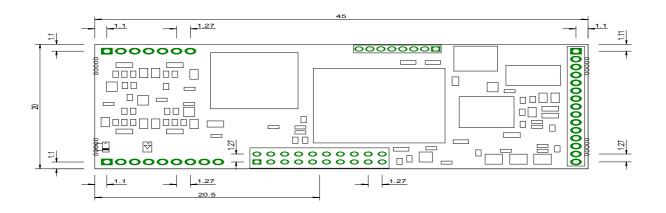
Outline Dimensions (Top View, all Dimensions are in Millimeters)
